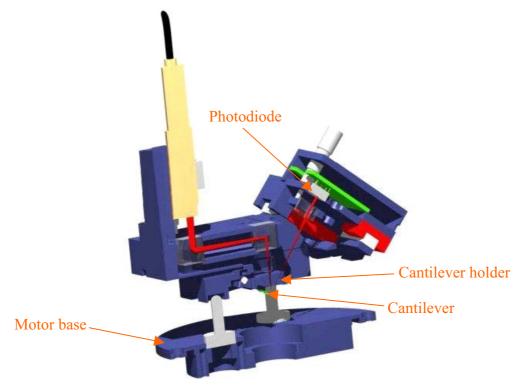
SPM Head cutaway view. Detail of the SFM head showing the laser path through the optical system (in red)
